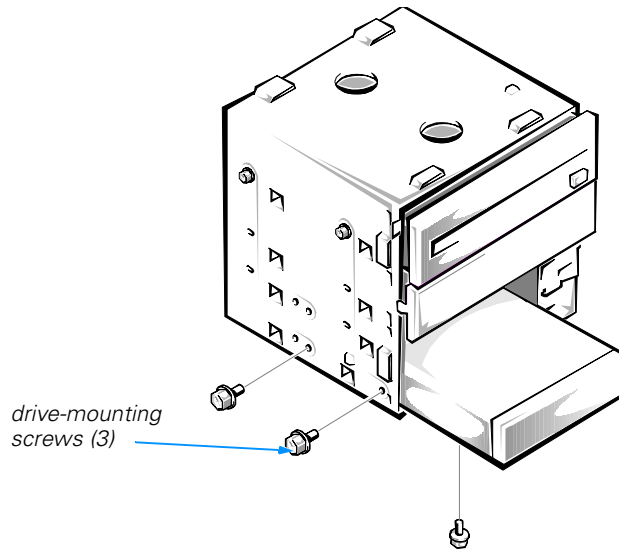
Installing a Drive in the Lower 3.5-Inch Drive Bay (Mini Tower Chassis Only)
